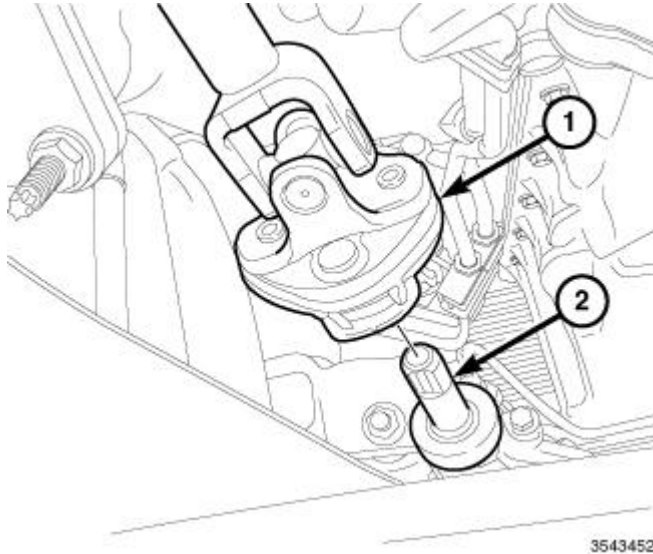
Intermediate Steering Coupler & Rack And Pinion
